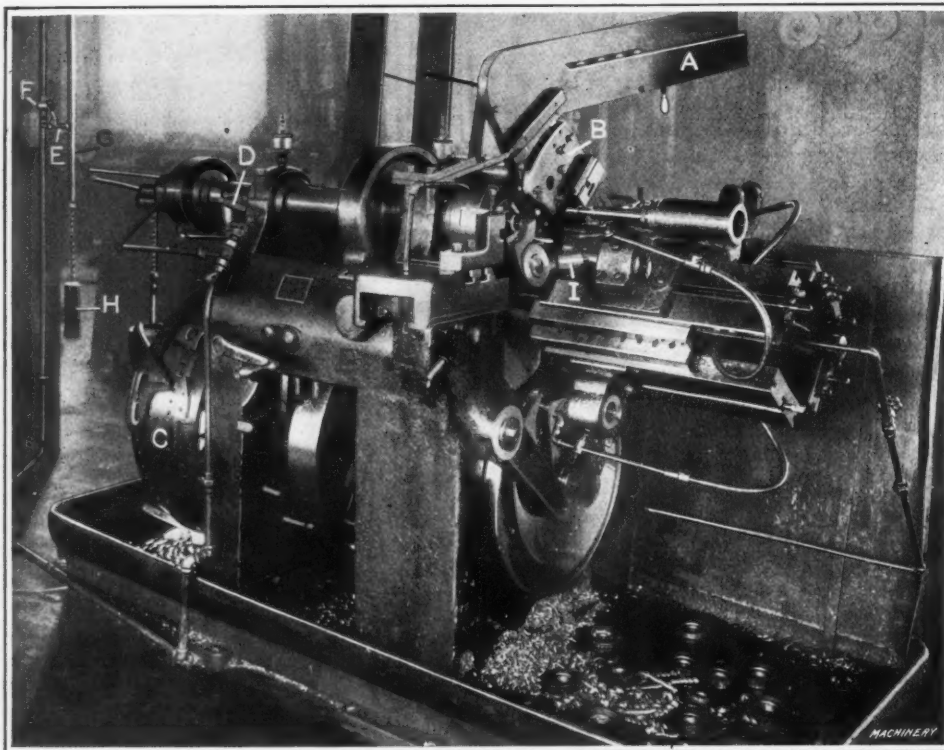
Gridley Automatic equipped for roughing out Blanks for Cutters used on the Fellows Gear Shaper
